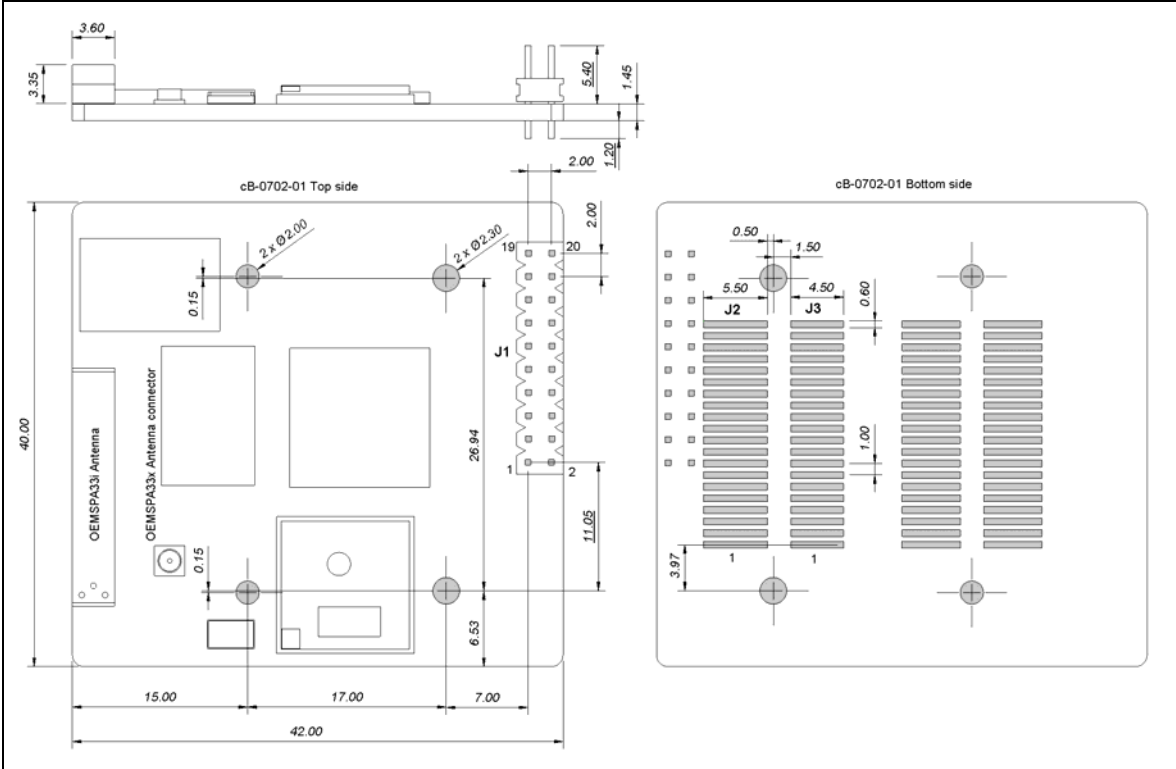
cB-0702-01 dimensions [mm]. The J2 pads are longer to fit both the SEI and FSI connector (see Section 5.4).
